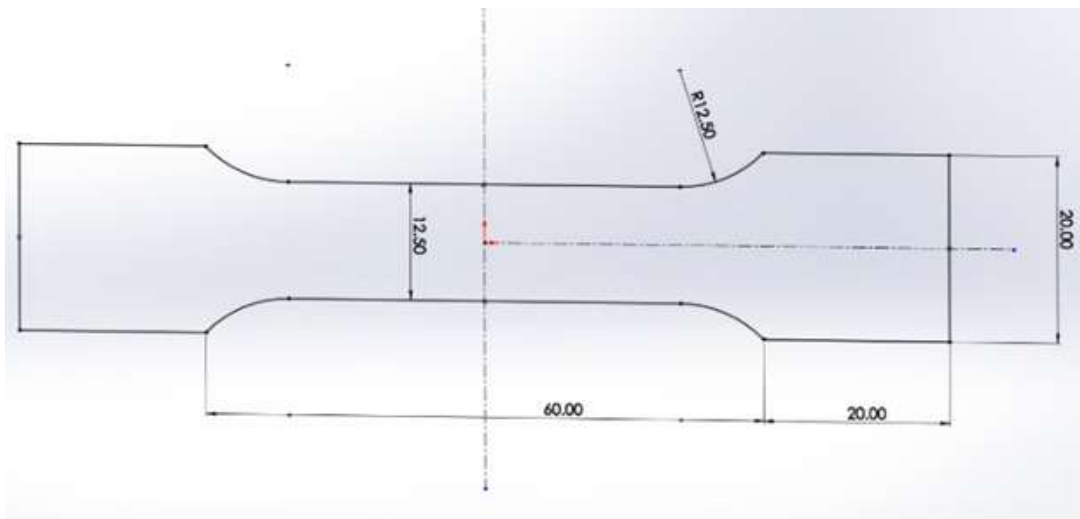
Drawing of Tensile Test Specimen according to ASTM E8 M04
